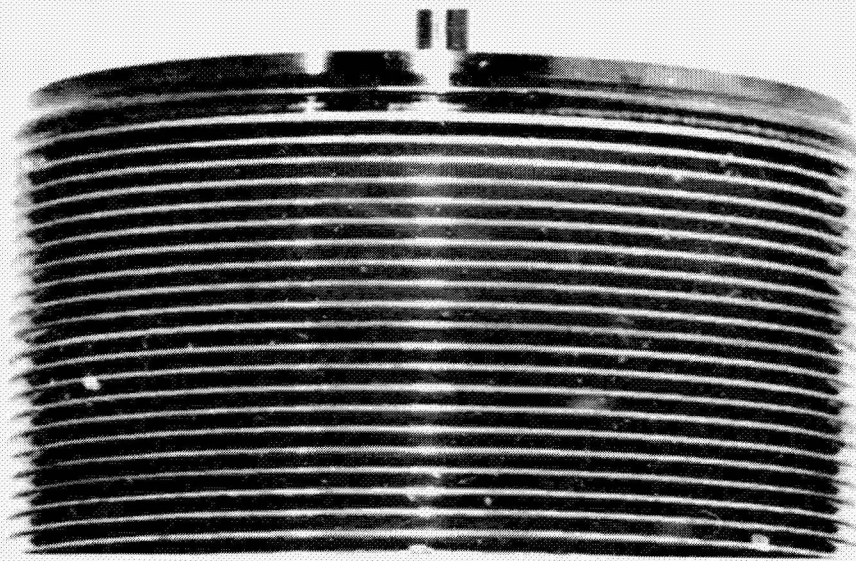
Valve Bellows After 100,000 Cycles of Operation, P/N X28400, S/N 001
